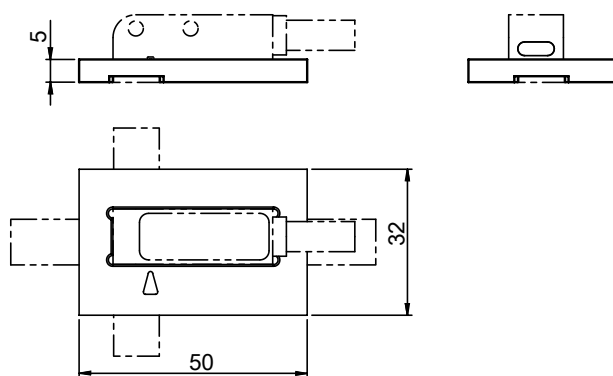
Sensor guide BAM TO-ML-019-SF2
